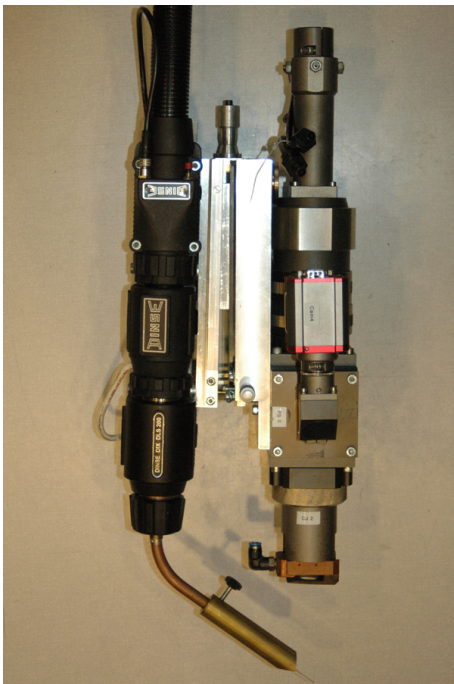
Photo of the SSCW head, consisting of a BEO D70 Trumpf laser welding head, combined with a Dinse DIX WDE 315 wire feeding torch.
